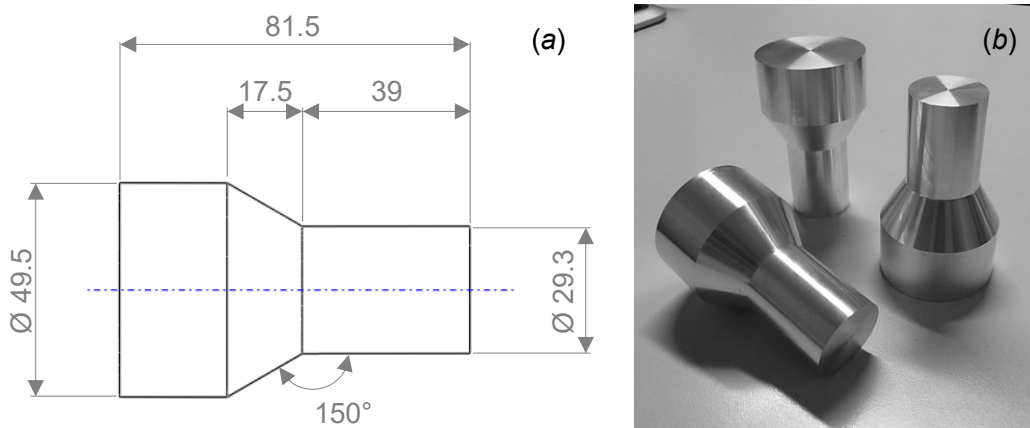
Investigated component: (a) sketch, (b) machined specimens.
